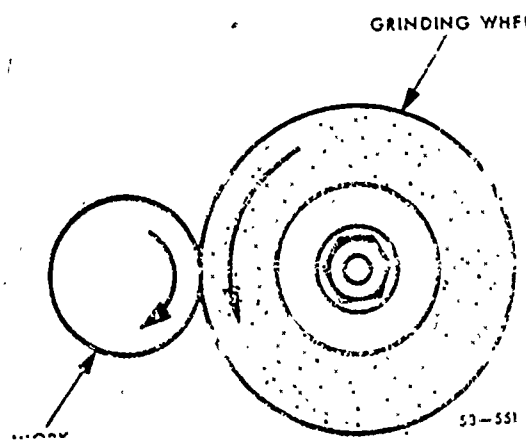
Wheel and cutter rotation for cylindrical grinding.
